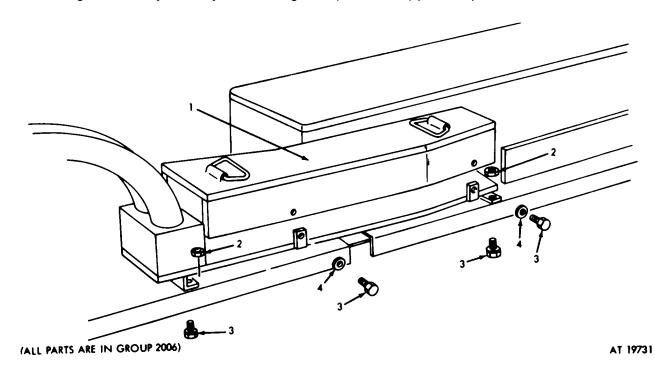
Hydraulic system armor guards (sheet 3 of 5)-partial exploded view.
